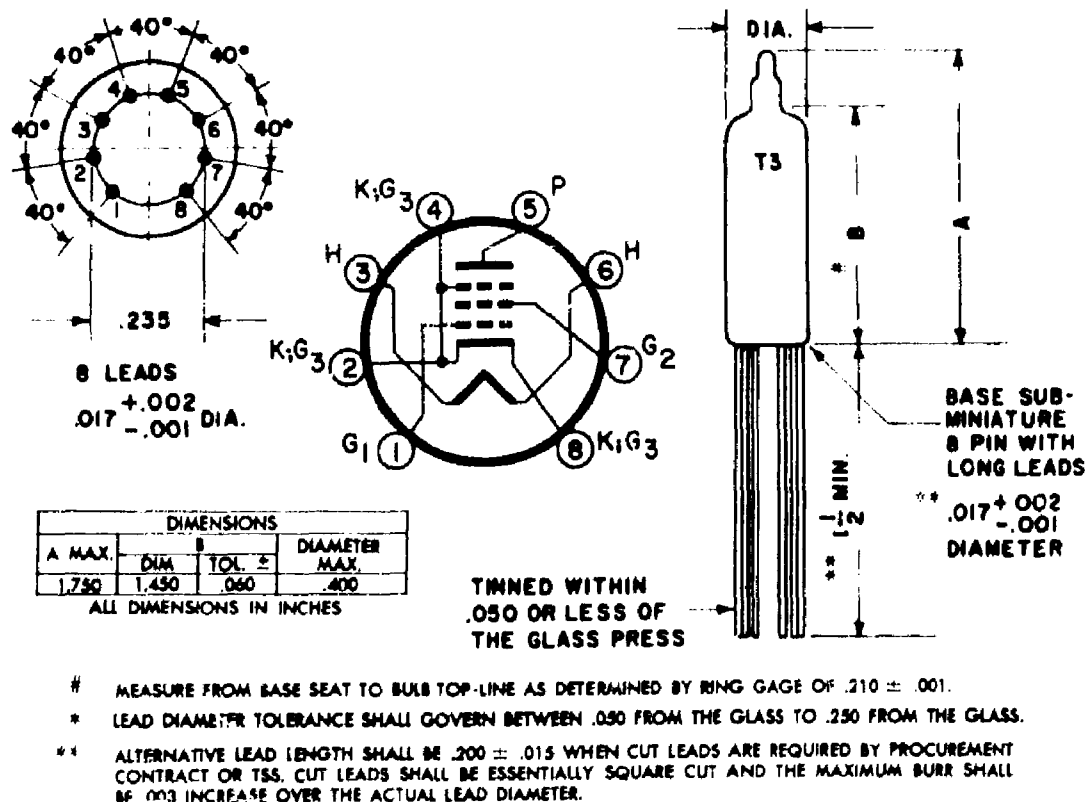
Outline Drawing and Base Diagram of Tube Type JAN-5902
